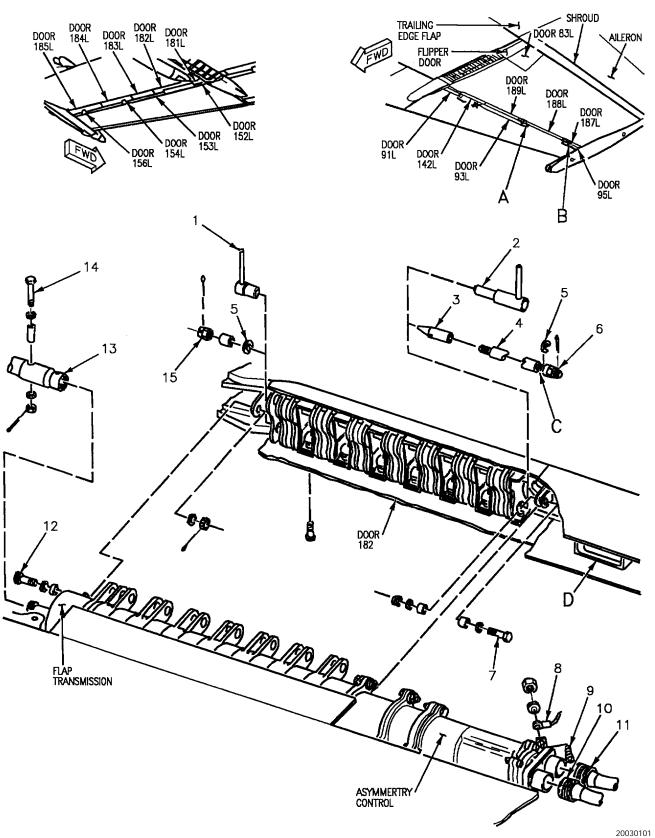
Outer Wing Leading Edge Flap (Sheet 1)
